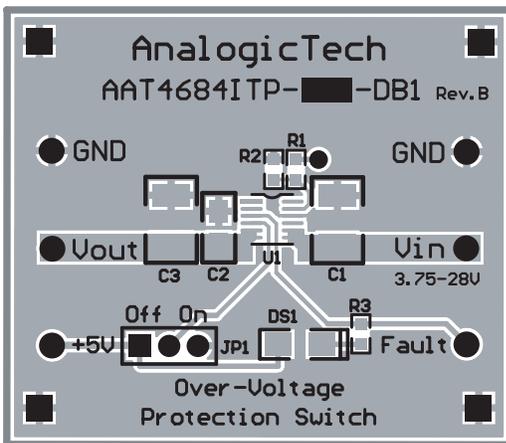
AAT4684 Evaluation Board Component Side Layout.
